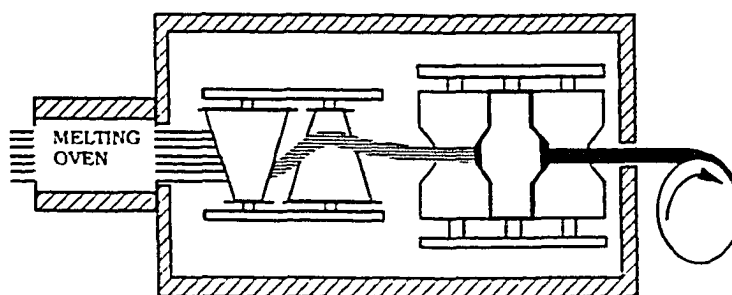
This is a schematic diagram of the heated box assembly used to evaluate techniques #5 through #9: "the heated roller machinery".
